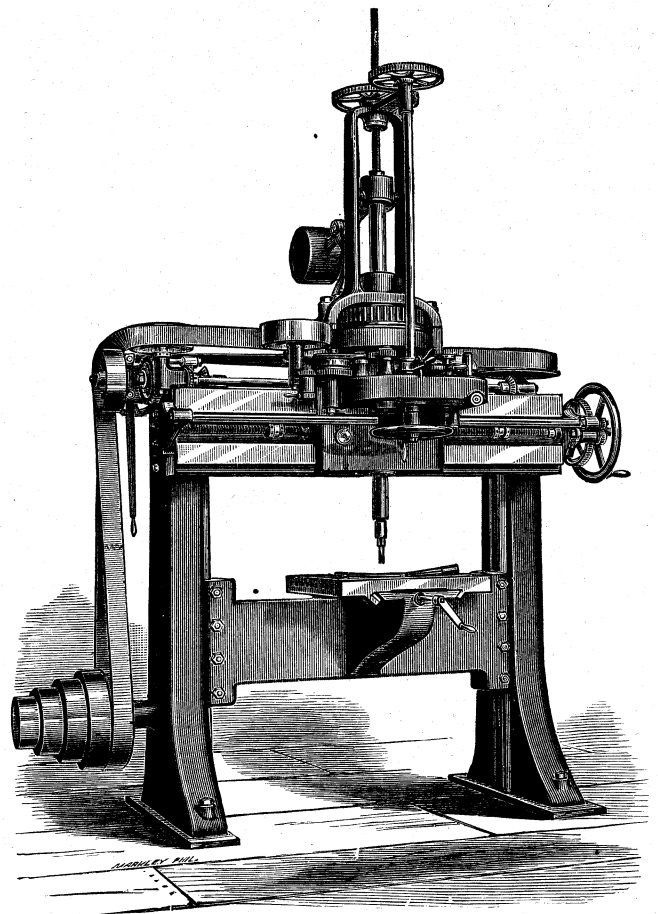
COMBINED DRILLING AND COTTER-DRILLING MACHINE.
